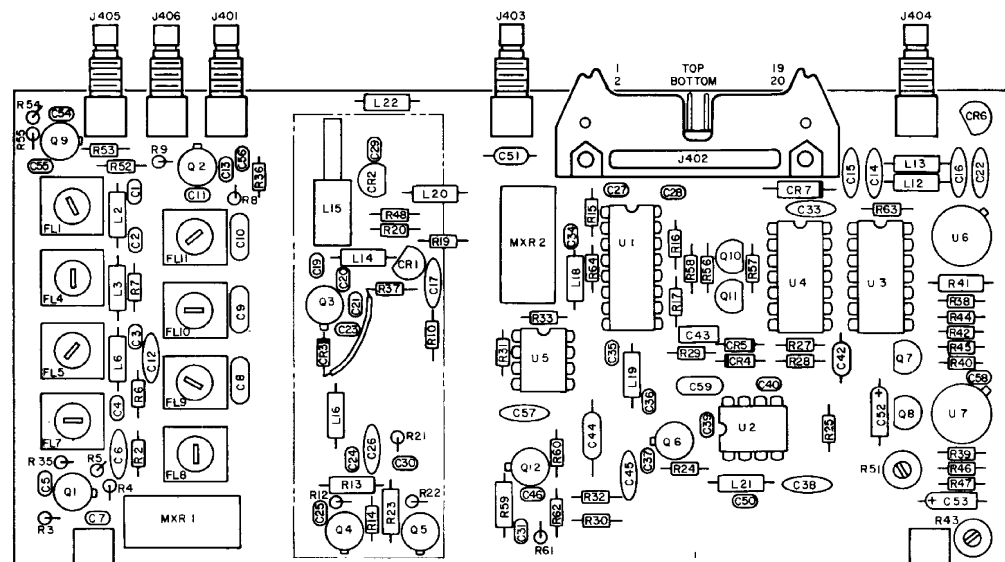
Receive Audio PC Board Assembly (0000-5213-301-F2)
